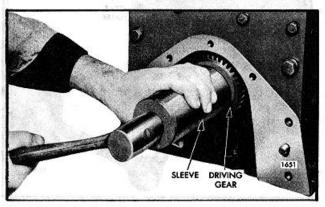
Installing Oil Pump Driving Gear on Crankshaft.
